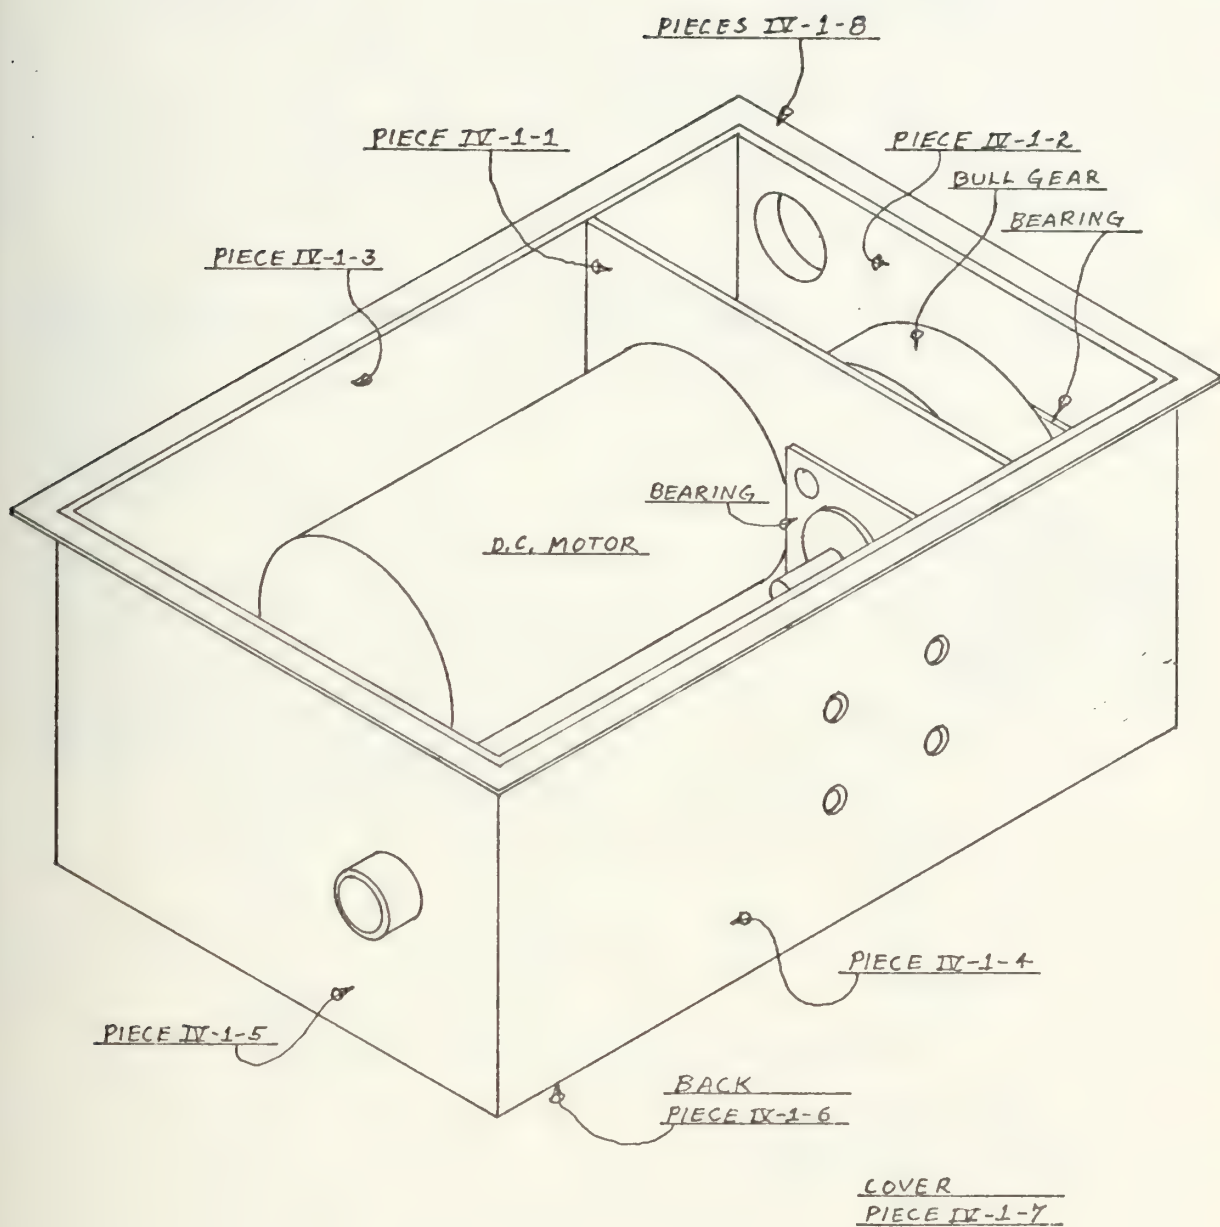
INSTRUMENT DRIVE MOTOR BOX, WITHOUT COVER
